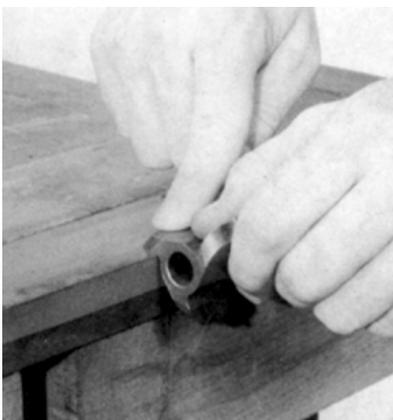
Lay the flat face of the cutter on the surface of the hone and rub the cutter across it.
